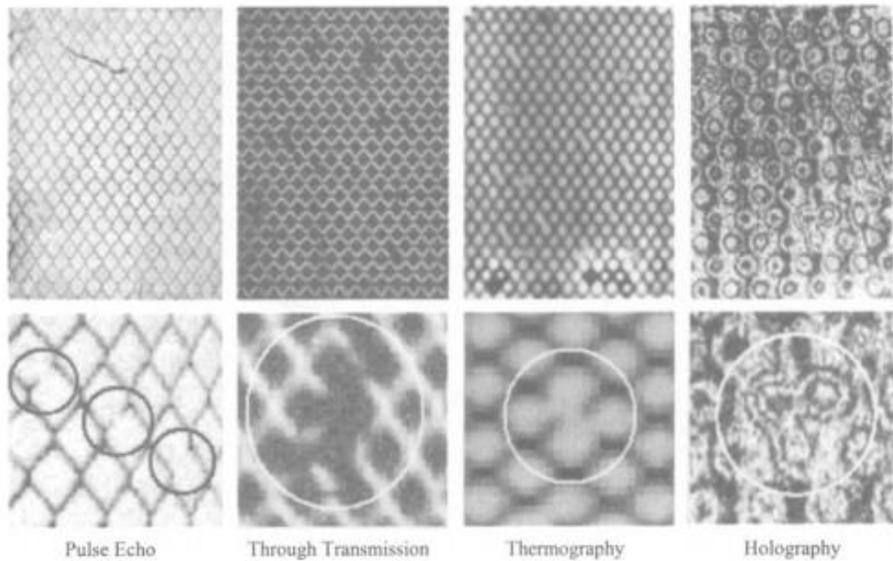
Inspection methods used for brazed honeycomb panels.
